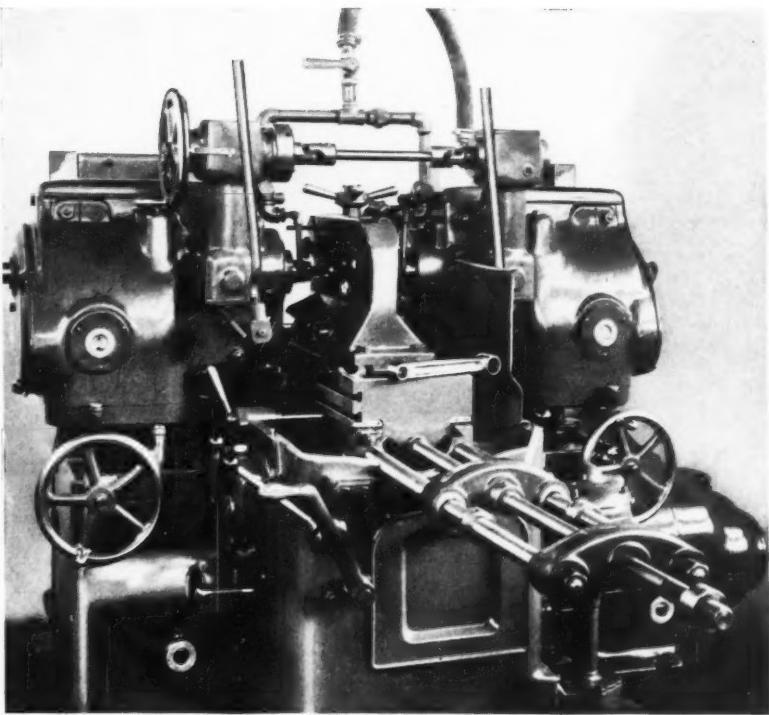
Machine Set-up for Milling the Channels in the Sides of Airplane Engine Baby Rods
